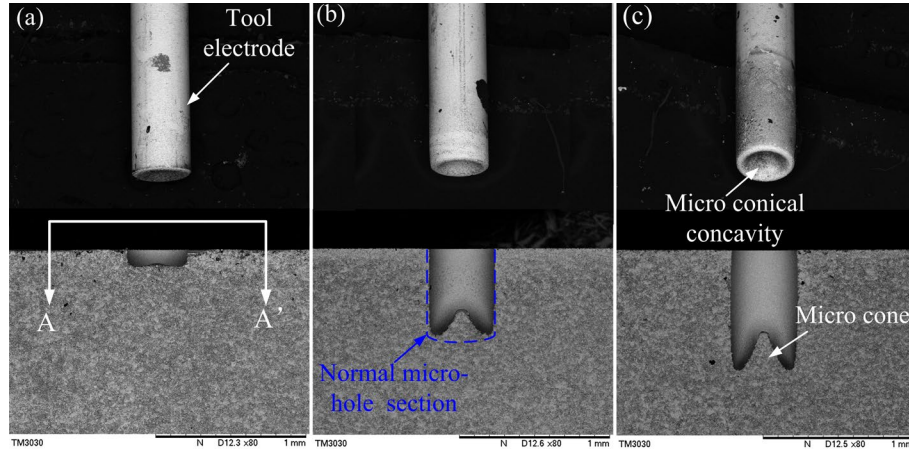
Micro-hole and tool electrode tip after machining using a positive polarity processing with different machining depths: a 200 μm , b 600 μm , and c 800 μm
